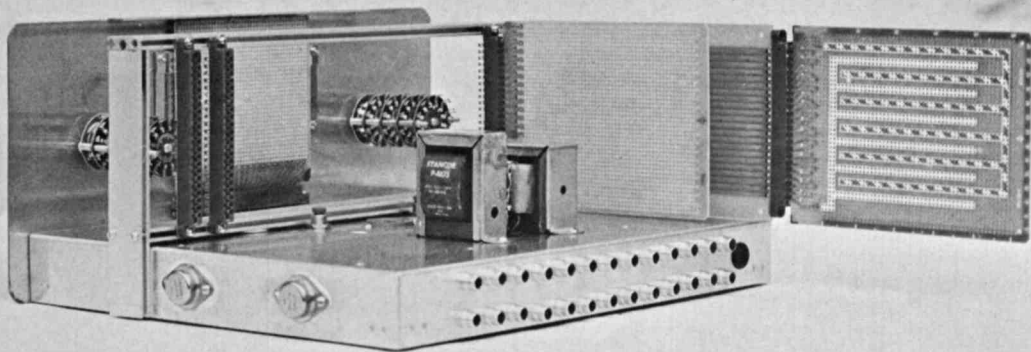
Rear view of digital accessory showing the mounting of Vectorboard to hold Minitron readouts and T-struts for other circuit boards prior to above-circuit chassis wiring.
